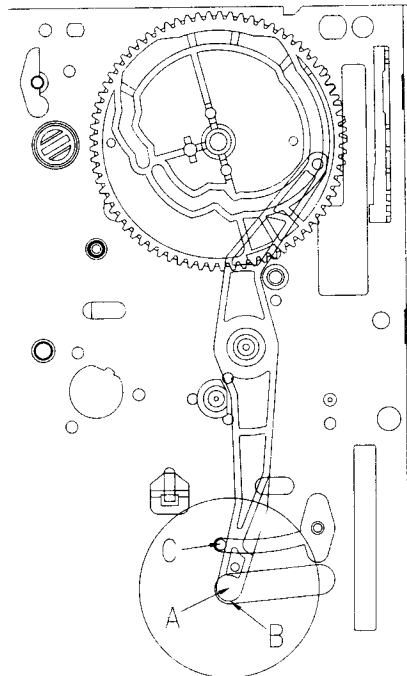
DATUM POSITION OF RELAY LEVER & CAM GEAR
